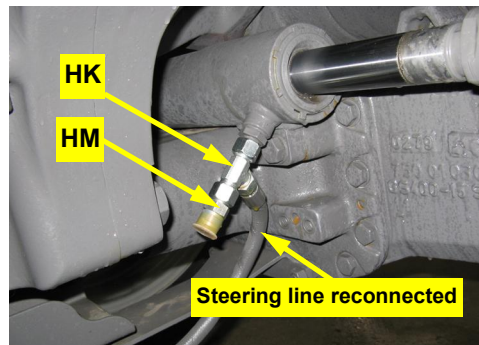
ii: Installed run-tee and adapter and reconnected steering line, right side
